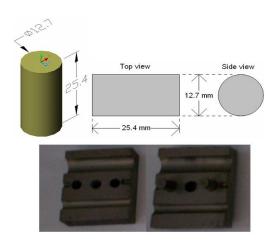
Geometric representation of Compression test specimen and metallic mould used for the fabrication purpose
